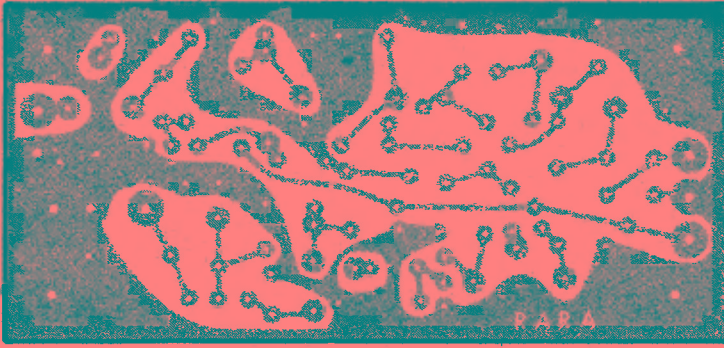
Scale-size layout for the pc board. The same pattern is used for either band. Foil side shown here.
